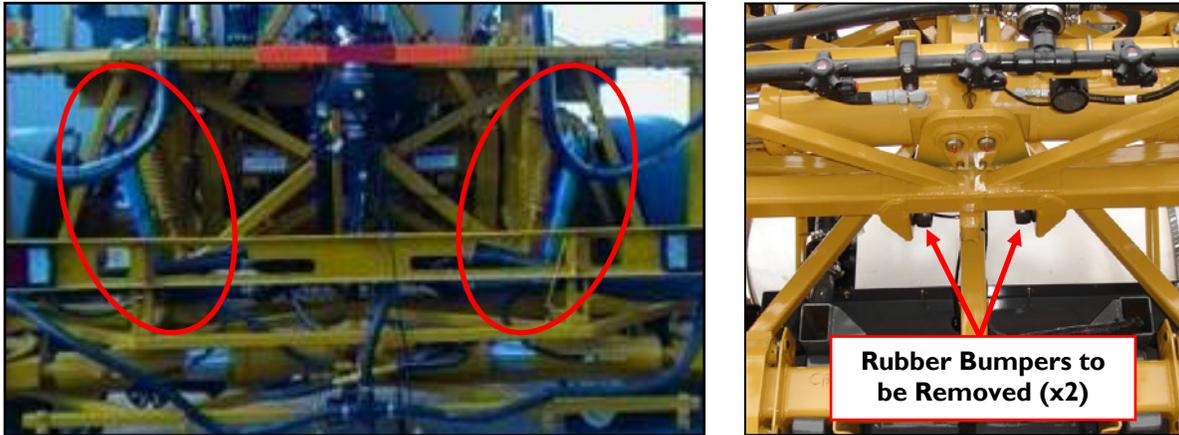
AGCO Factory Spring / Damper and Rubber Bumper Location
